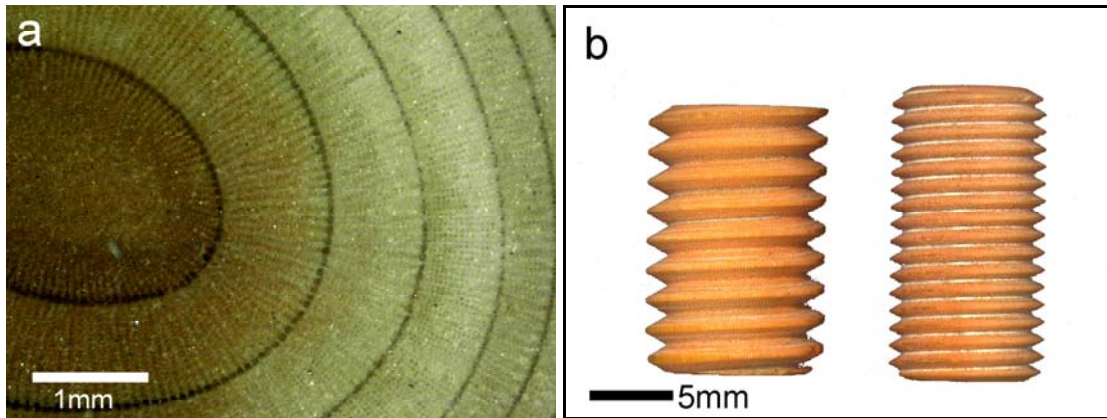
Optical images of (a) inner ring structures of a spine, and (b) machined screw-shape spines.
